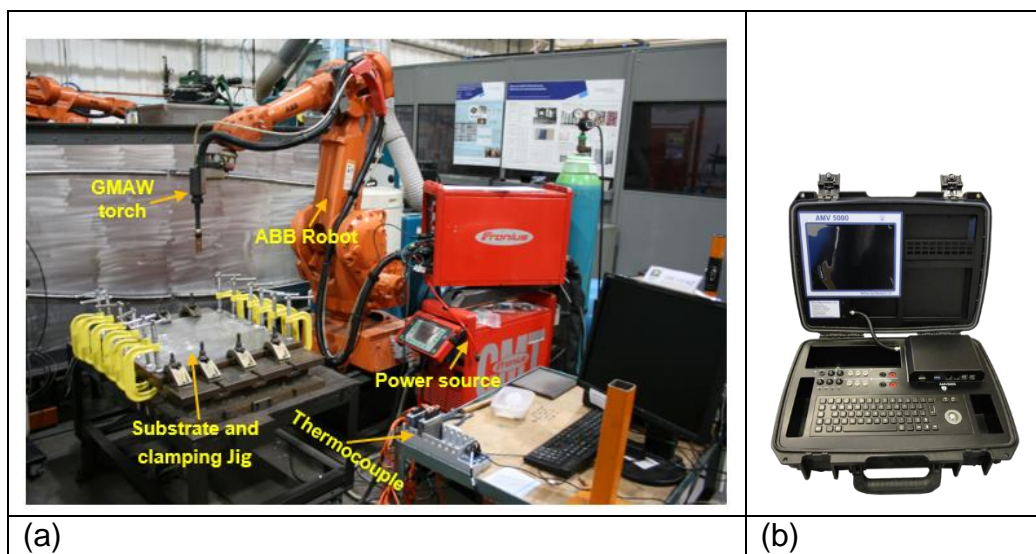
(a) Equipment set-up (b) AMV 5000 weld data loggers
